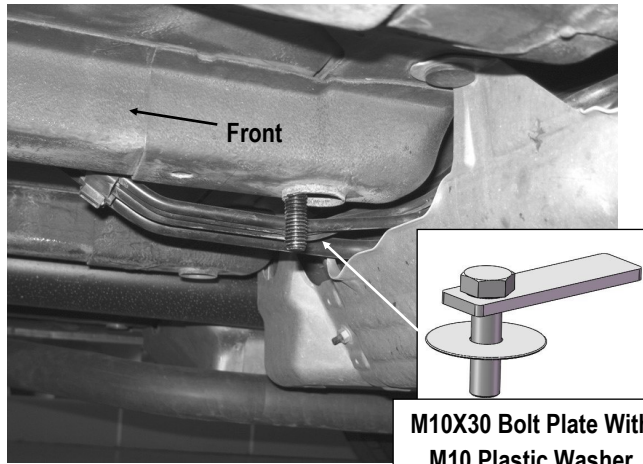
Driver Side Front Support Bracket Installation (Front View Shown)
